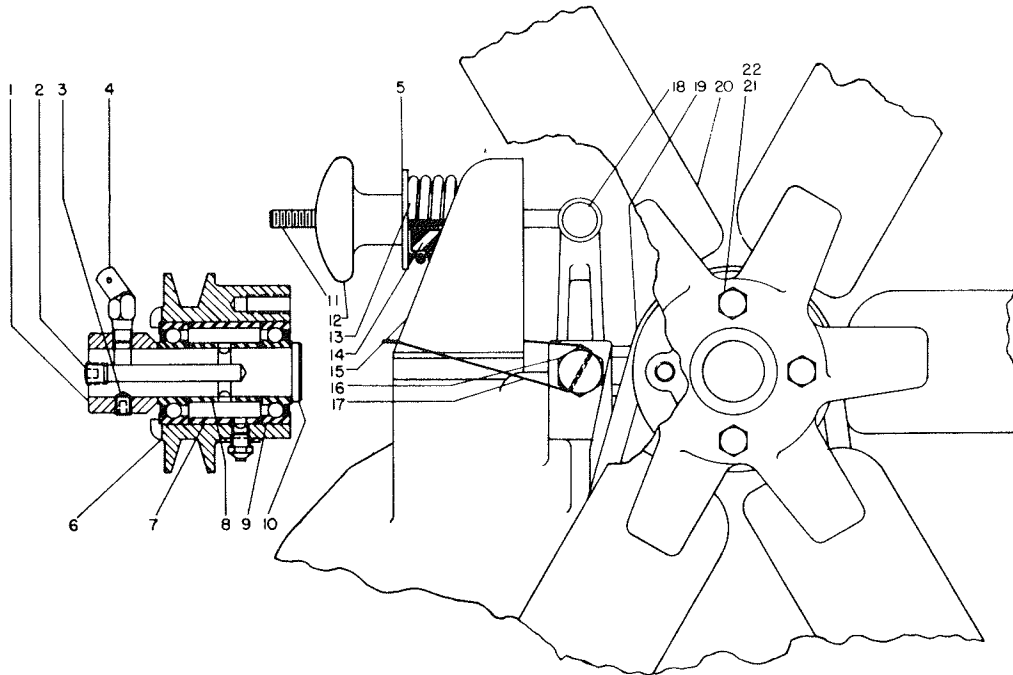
FAN SUPPORT ASSEMBLY PARTS FOR MODEL "B-1" AND "D-1" UNITS
